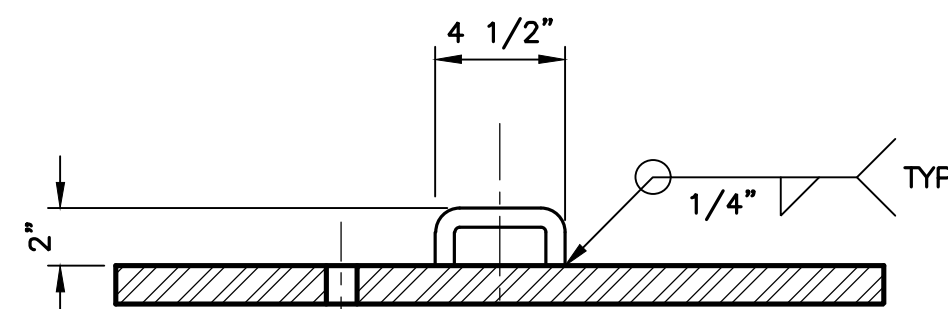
FLANGED WELD-O-LET ASSEMBLY
